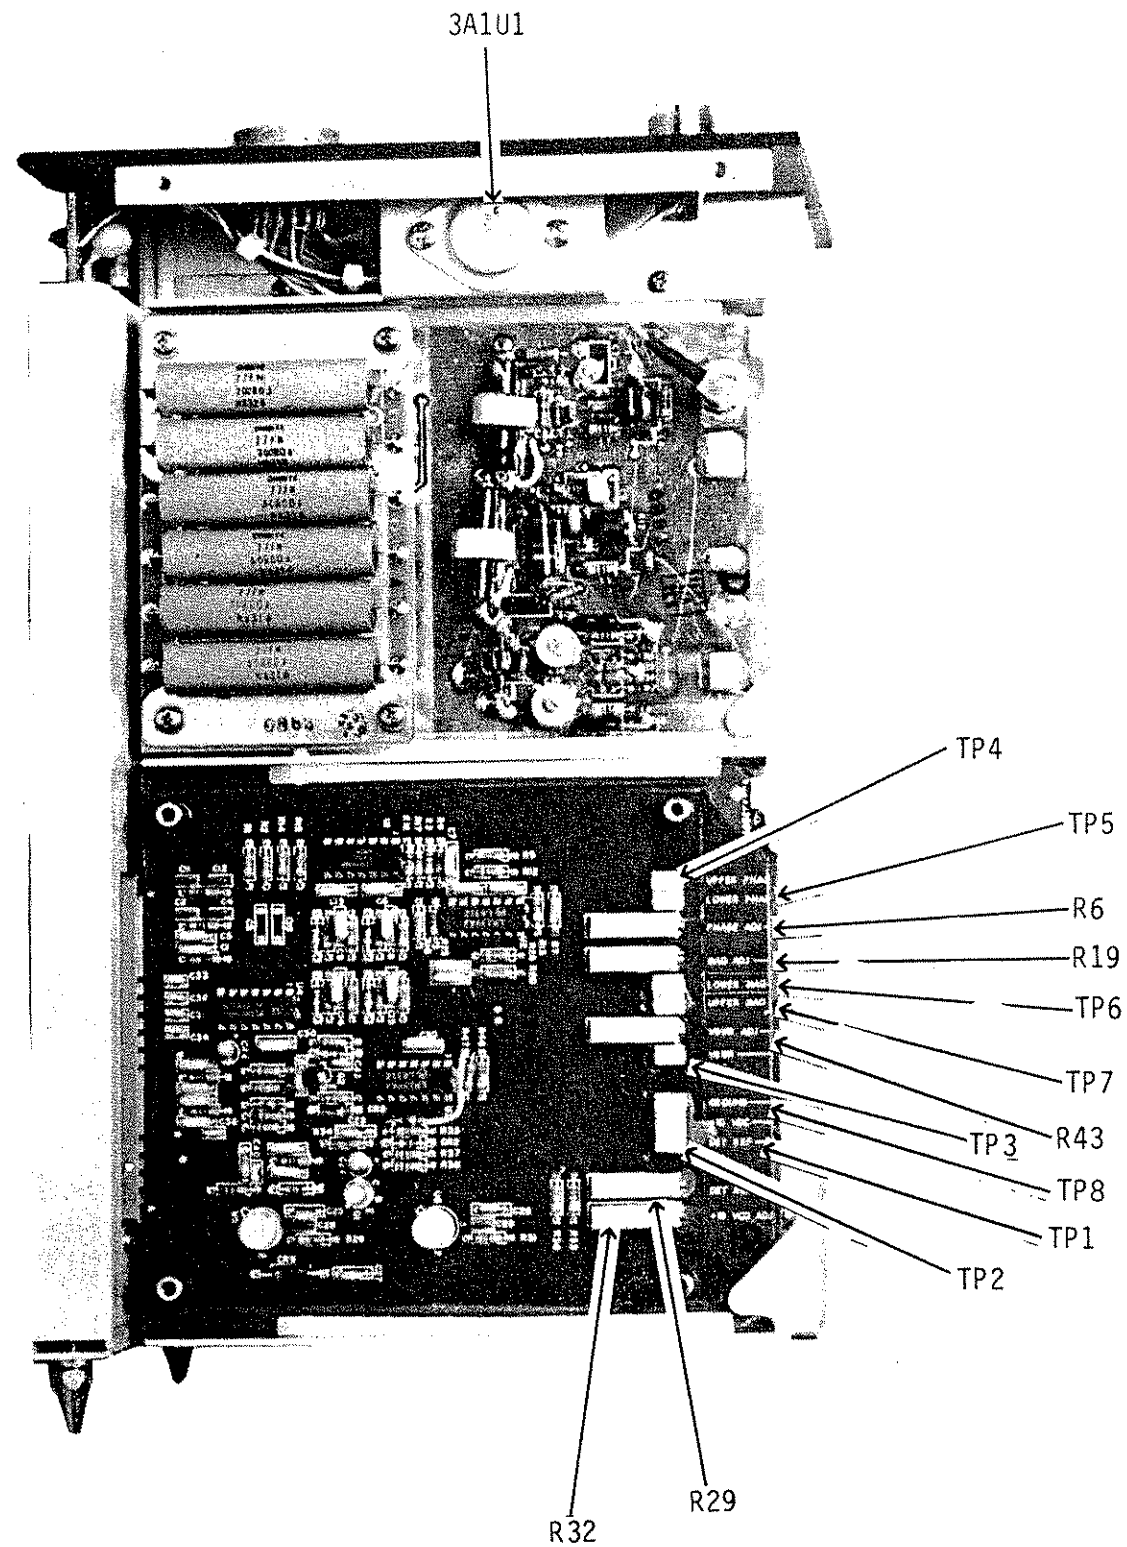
MAJOR ASSEMBLY AND COMPONENT LOCATIONS (Sheet 1 of 5)
